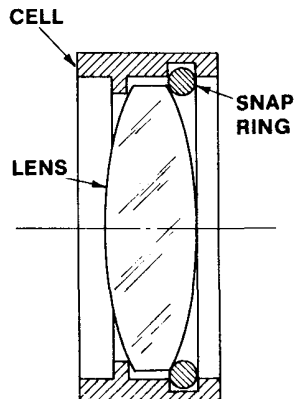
Technique for holding a lens in a cell with a snap ring in a groove
